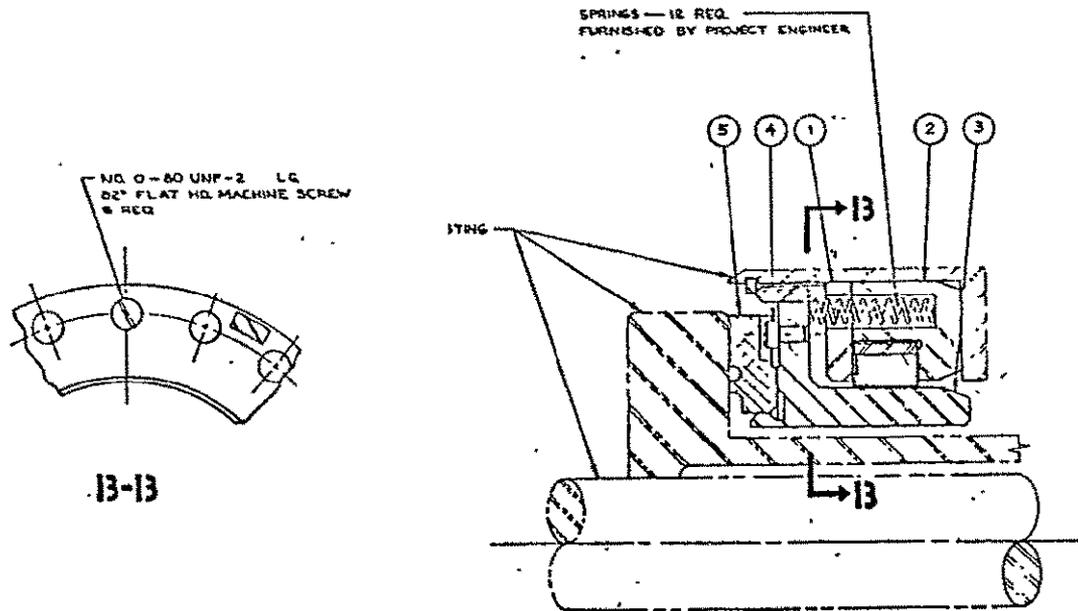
NASA-Designed Oxygen Face Seal With Composite Piston Ring
